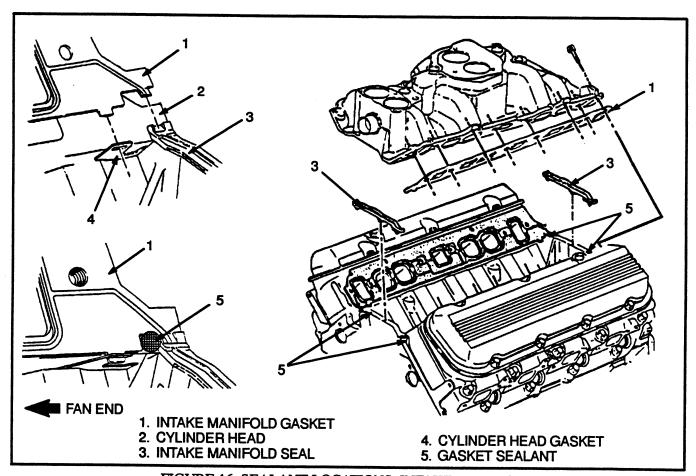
SEALANT LOCATIONS, INTAKE MANIFOLD
